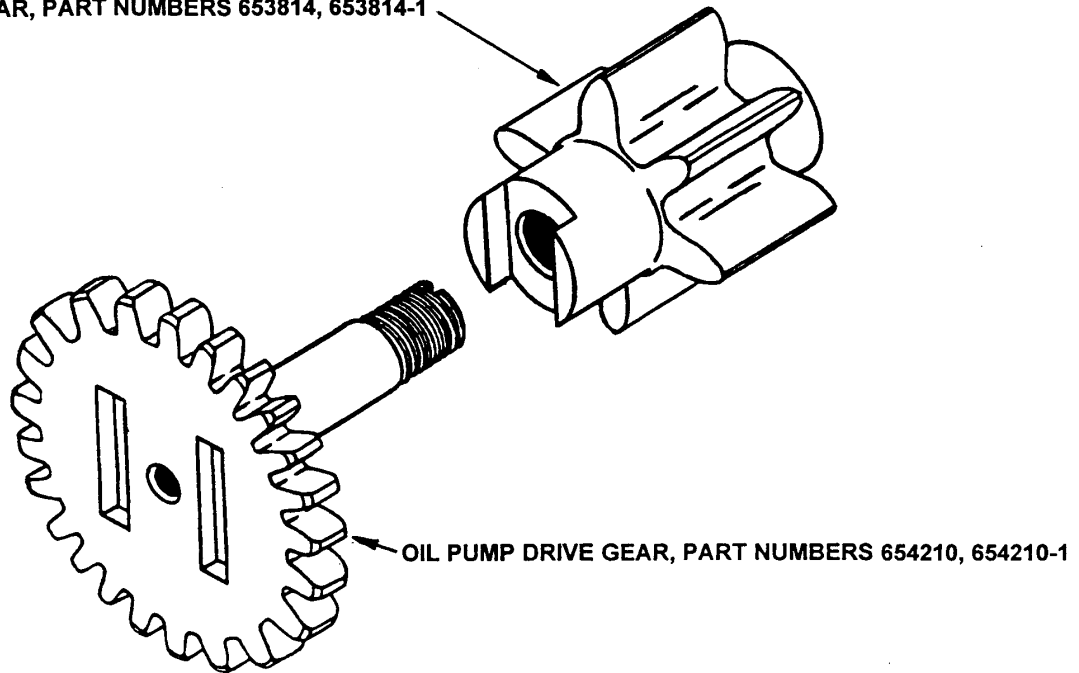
OIL PUMP DRIVE GEAR AND OIL PUMP GEAR
